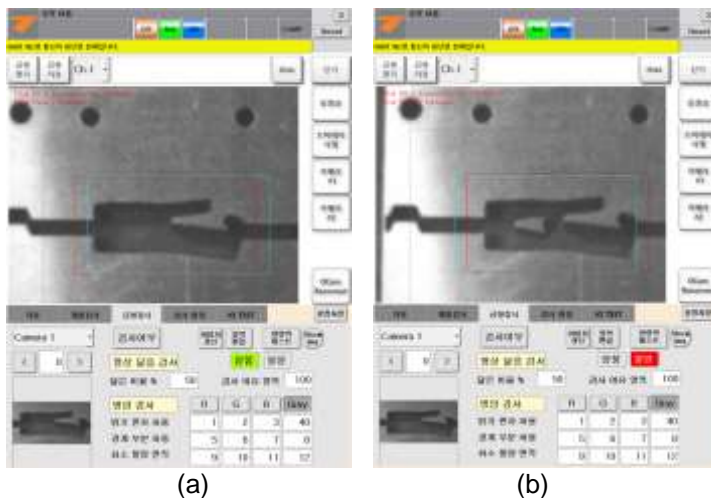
Mold Image Processed by Mold Inspection Module: (a) Mold Image Having No Defect, (b) Mold Image Having Defect
